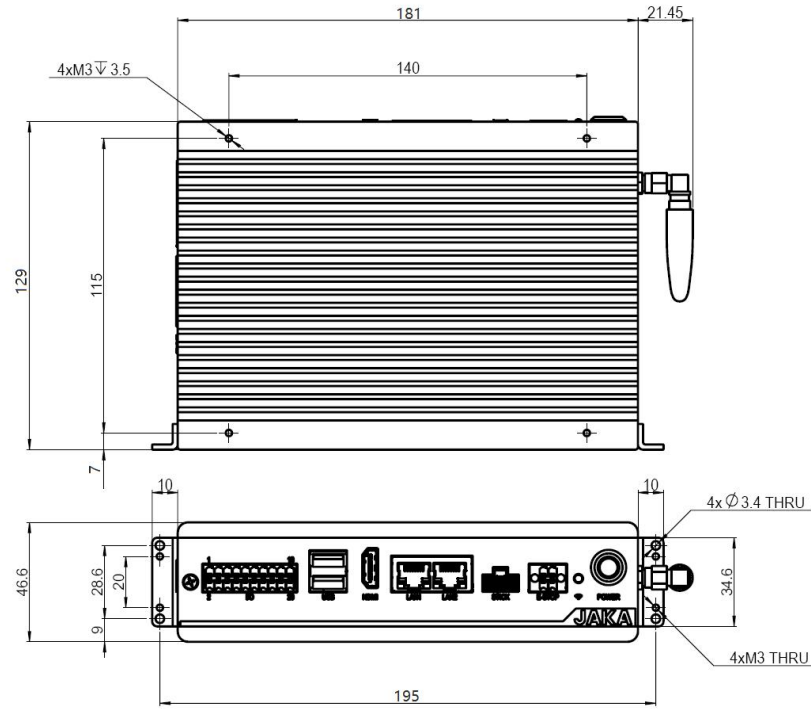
Outline Dimensions and Installation Hole Bitmap
